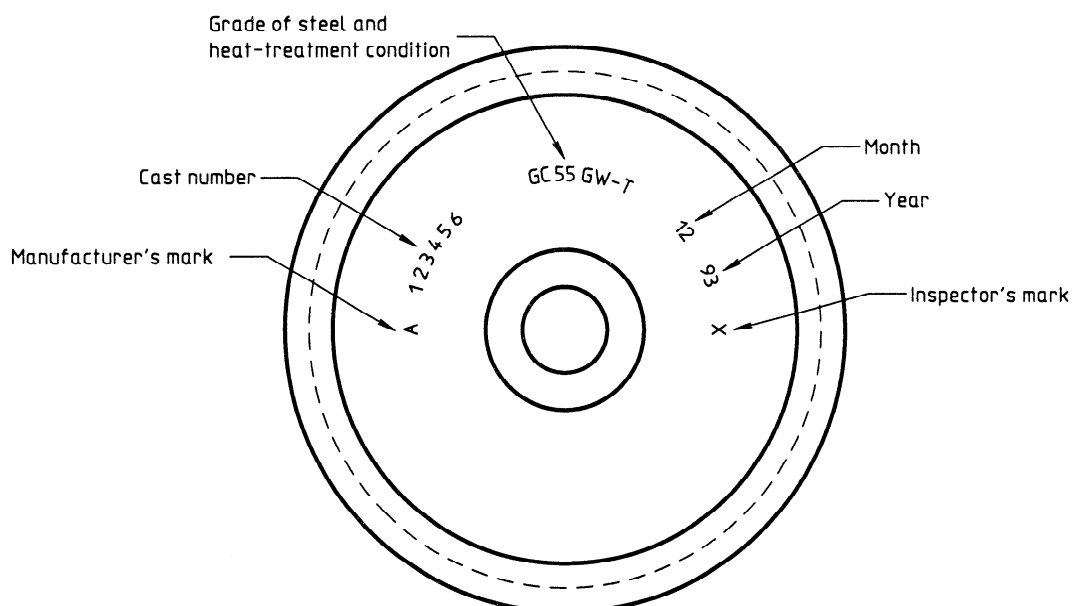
Example for marking of rolled, forged or cast wheels by stamping (see 5.6)
